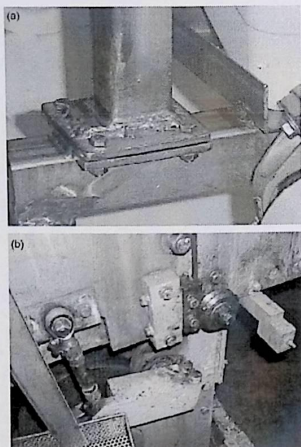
The pits, cracks, crevices, recesses, open seams, gaps, lap seams, bolts and threads will accumulate dirt and will make this equipment not cleanable. Moreover, galvanic corrosion can be observed. *Courtesy of John Butts, Lund O'Frost.
